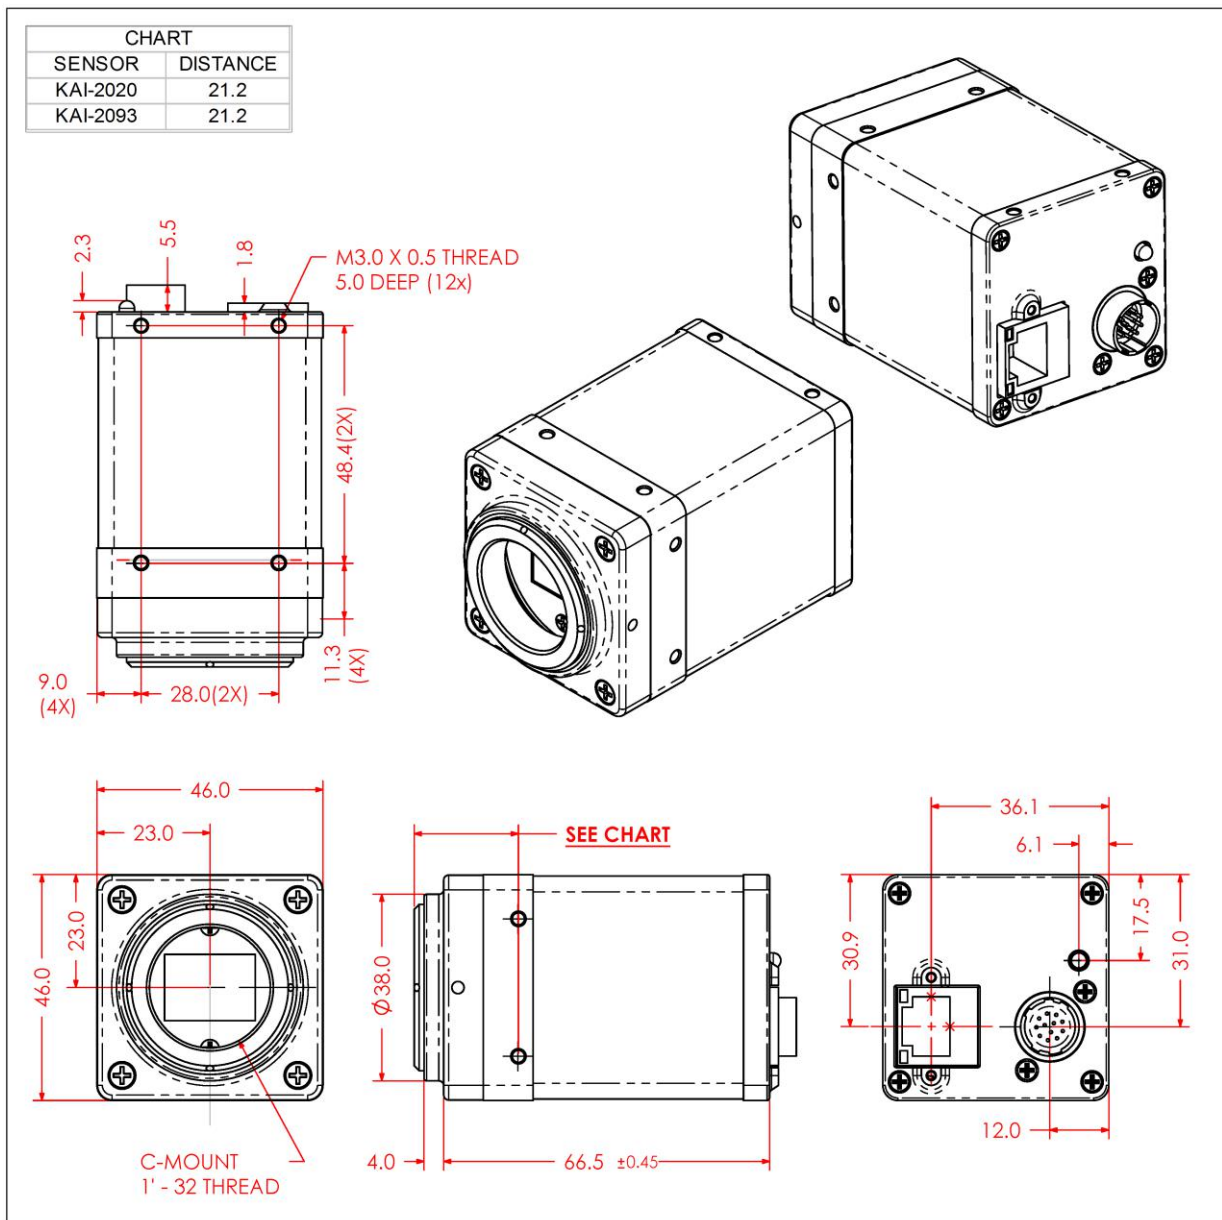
C-mount GigE vision output – dimensional drawings for IGV-B1620 and IGV-B1920.
